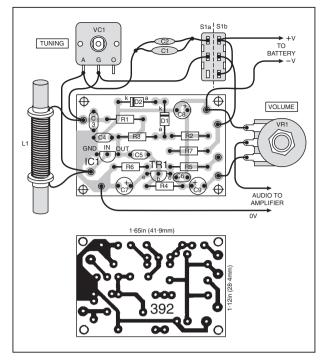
Printed circuit board component layout, interwiring to off-board components and full-size underside board copper track master.
